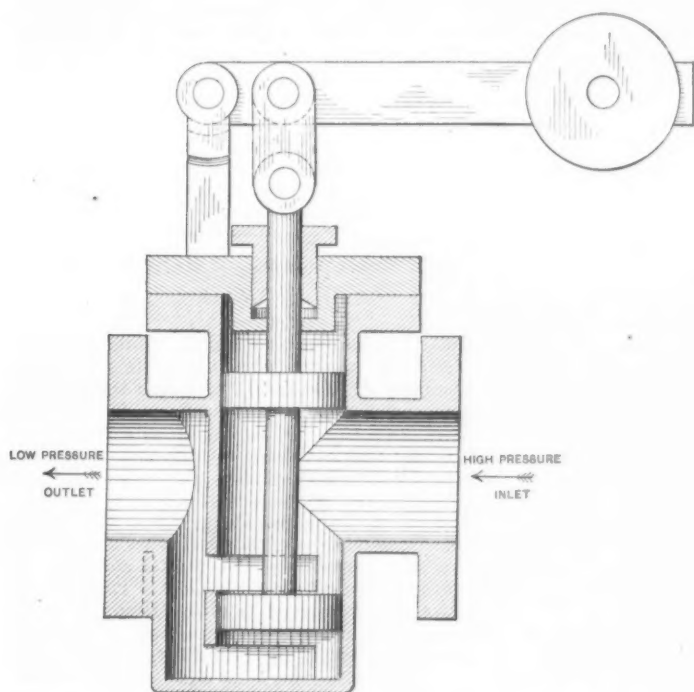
Pressure-Regulating Valve, with Equilibrium Piston Valve, Lever and Weight.
